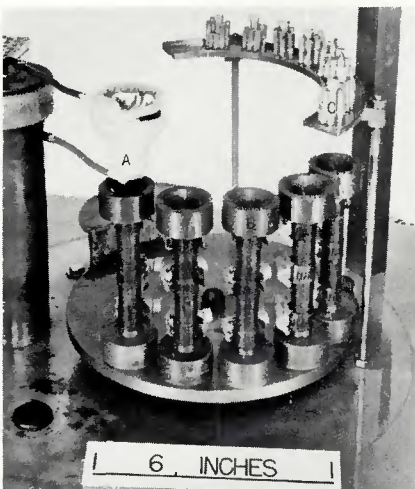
Levitation melting assembly: A-work coil; B-grooved molds; C-specimens
